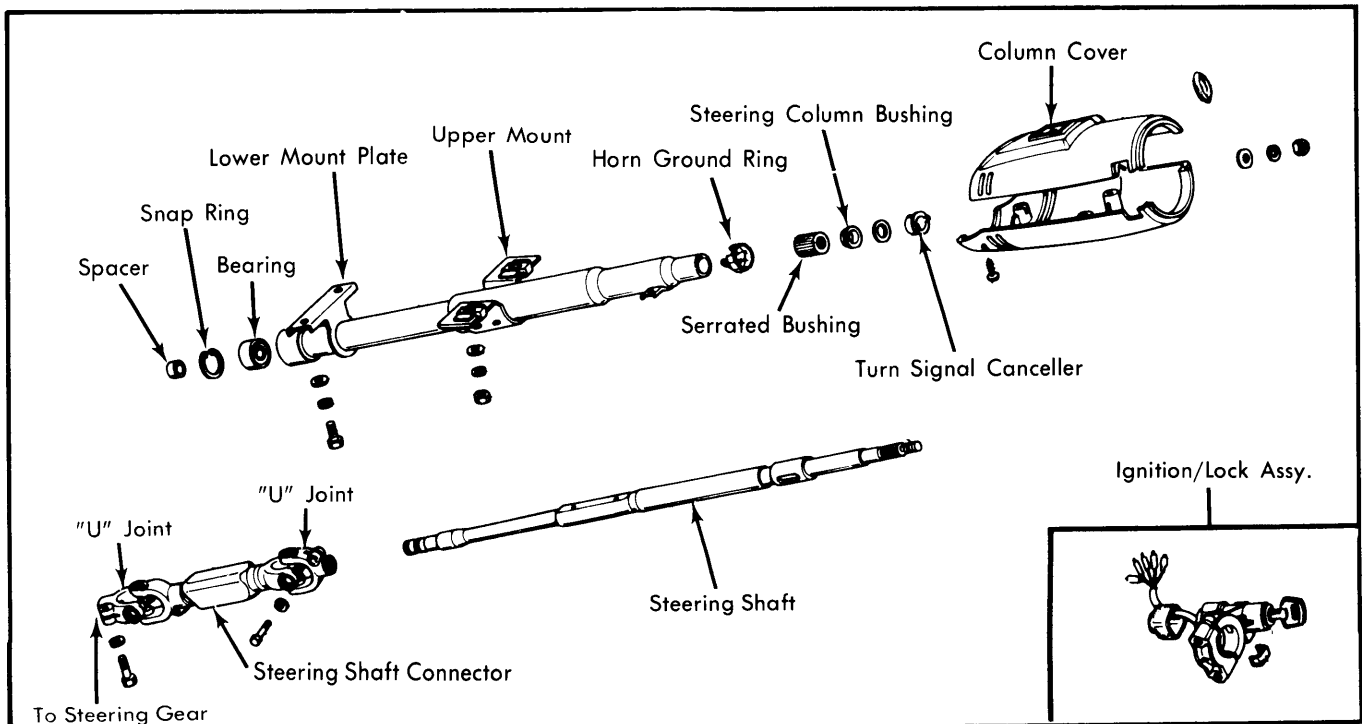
Exploded View of Civic CVCC and Accord Steering Column
